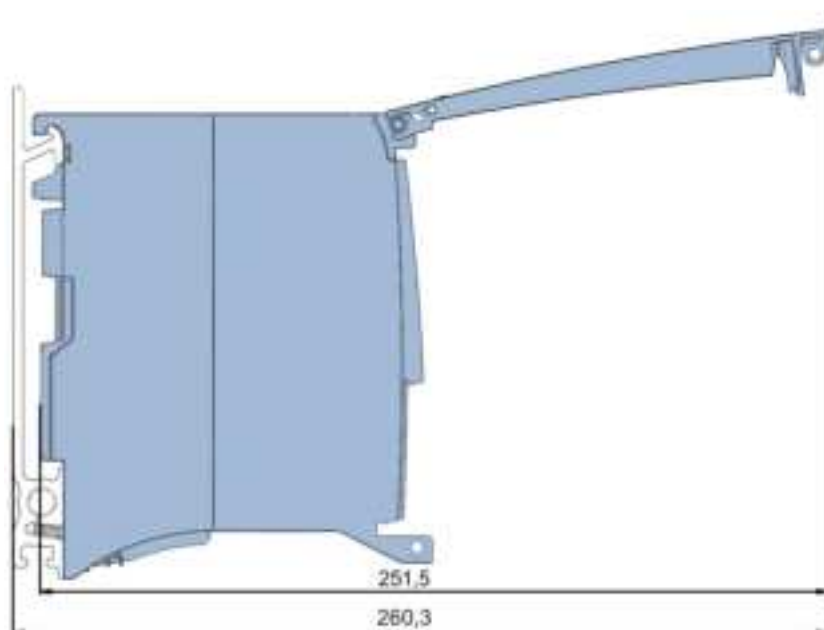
Dimensional drawing of the communications module CM PtP RS422/485 BA in side view with open front flap
